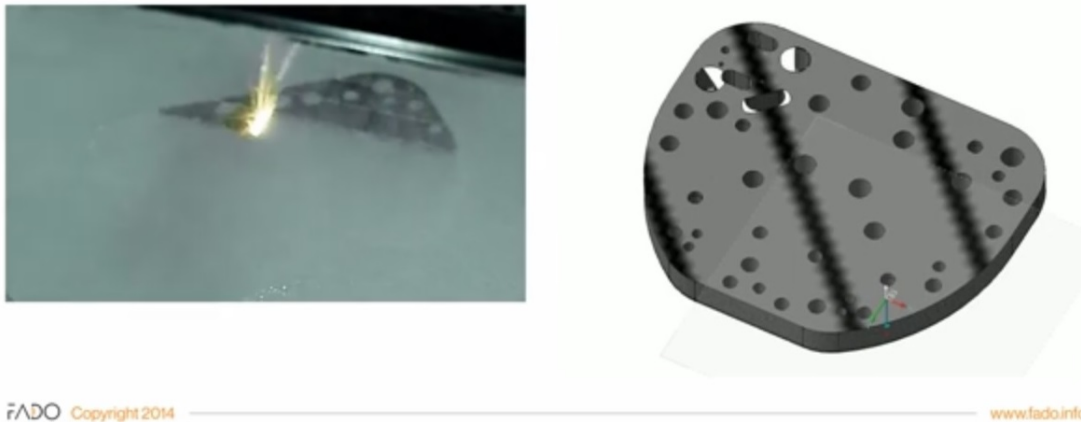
DMLS manufacture of the mould insert showing the cooling channels and holes for the ejector pins. (<http://www.eos.info/tooling>)
